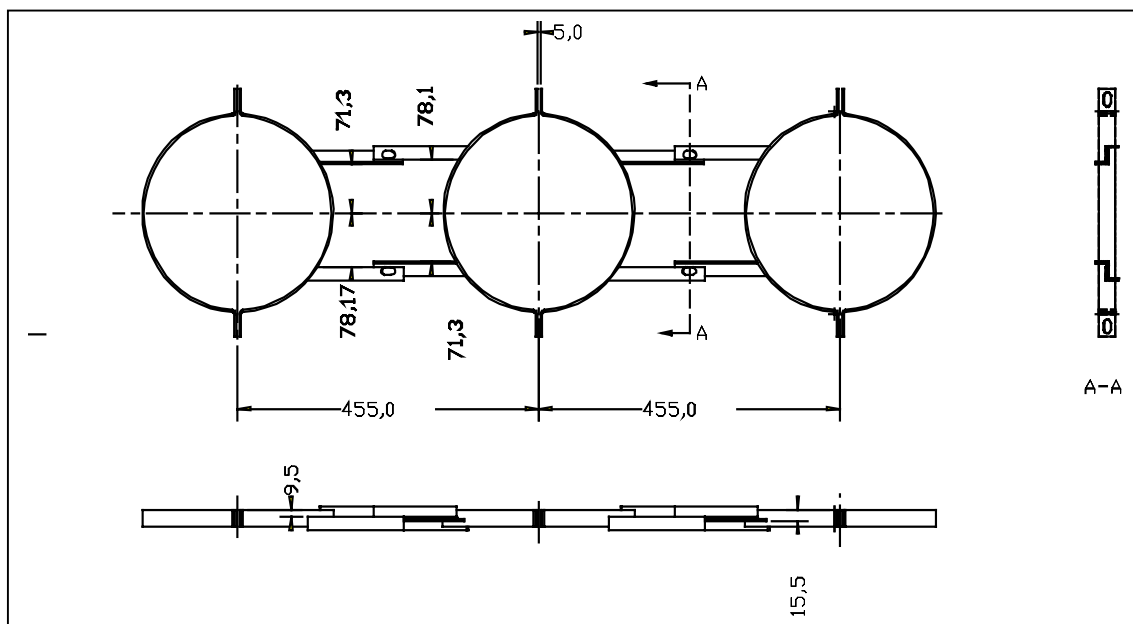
Layout of typical clamp design to support a Trio assembly during lifting.
